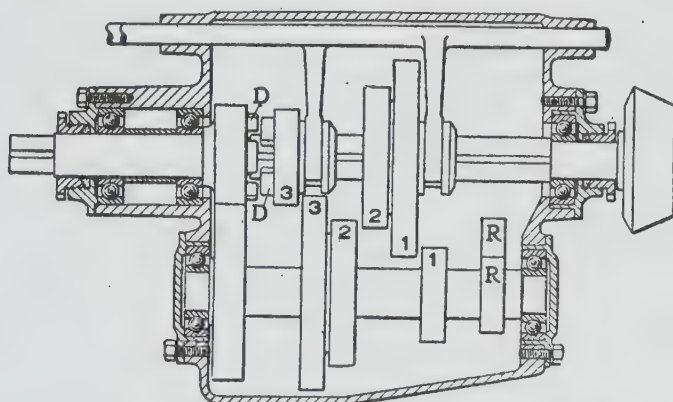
SELECTIVE TYPE FOUR SPEED AND REVERSE SLIDING GEAR
